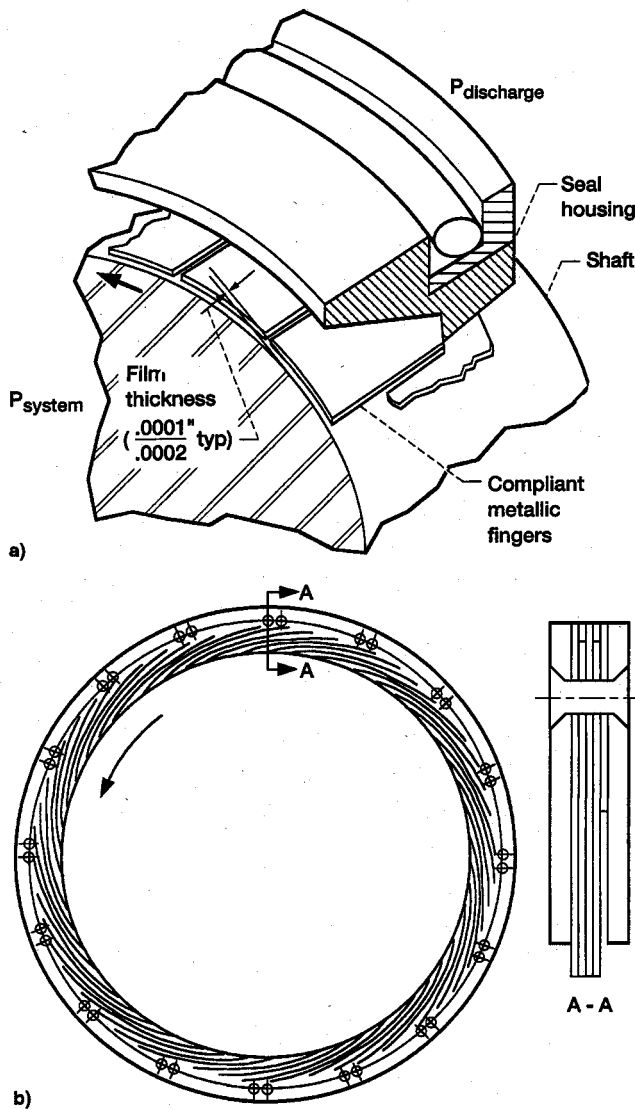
New seal concepts: a) compliant metallic hydrodynamic shaft seal¹⁶ and b) laminated finger seal.¹⁷
